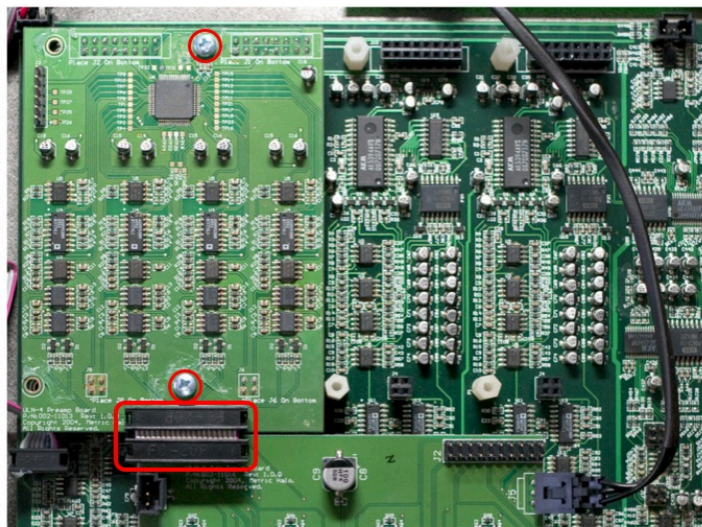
Installing the Ch. 1-4 Mic Pre Board
